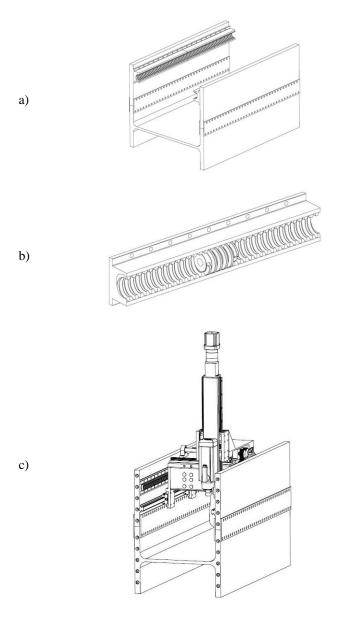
a) Modular bed structure with racks; b) screw-rack geometry; c) bed structure hosting one moving milling cross-table
